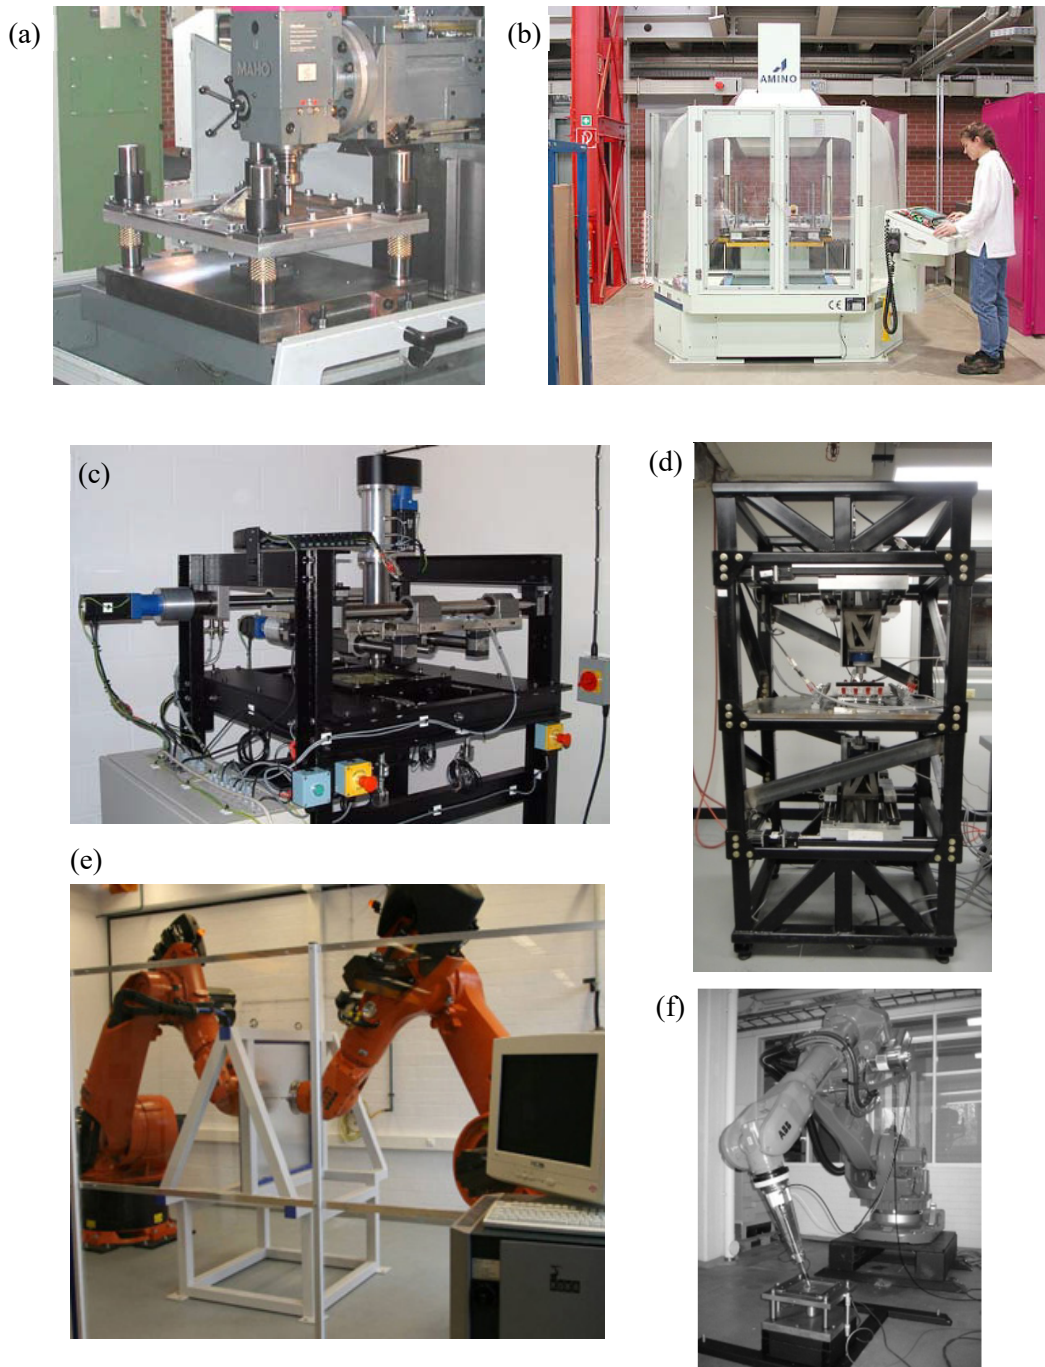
ISF forming platforms: (a) Modification of a conventional milling machine [9]; (b) Dedicated ISF machine from AMINO Corporation [35]; (c) A self-designed ISF machine at the University of Cambridge [33]; (d) A self-designed DSIF machine at Northwestern University [11]; (e) A DSIF systems using two industrial robots [36]; (f) An ISF system based on an industrial robot [37].
